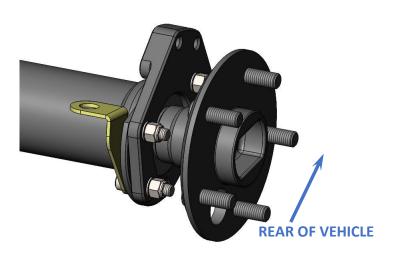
Primary Caliper Bracket Installed (DB1515BR LH Side Shown)
